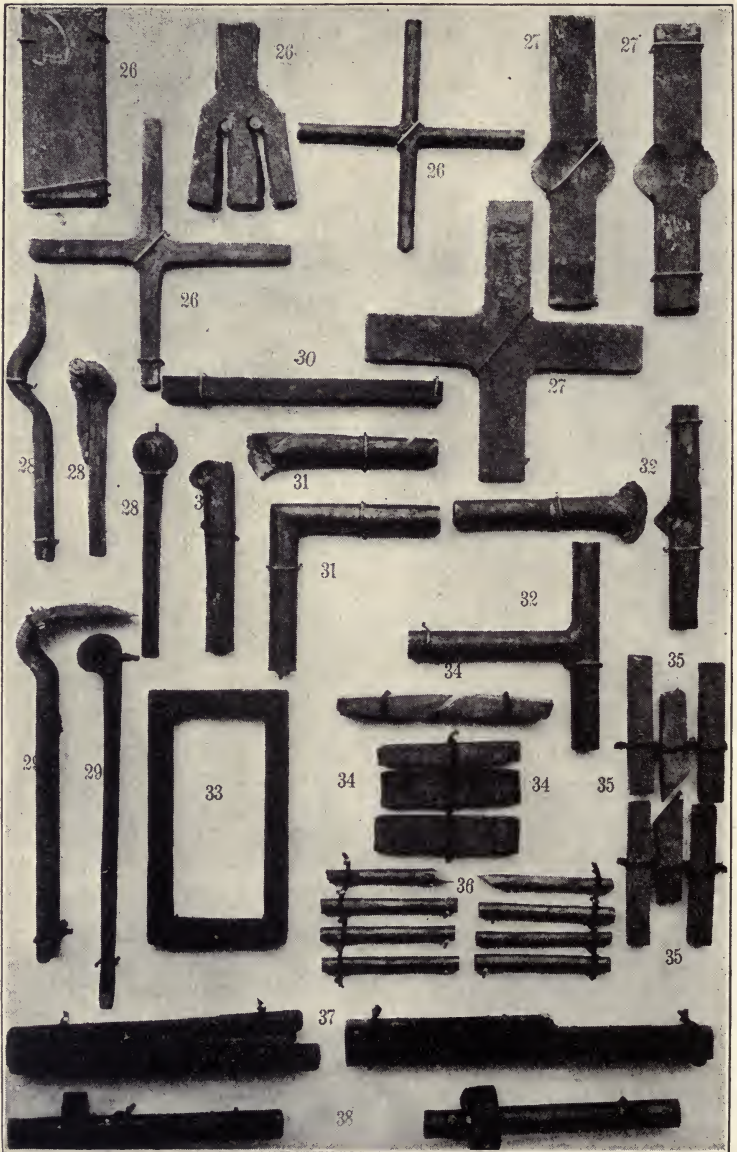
WELDING EXERCISES, COURSE IN FORGING, SCHOOL OF MECHANIC ARTS, BOSTON
